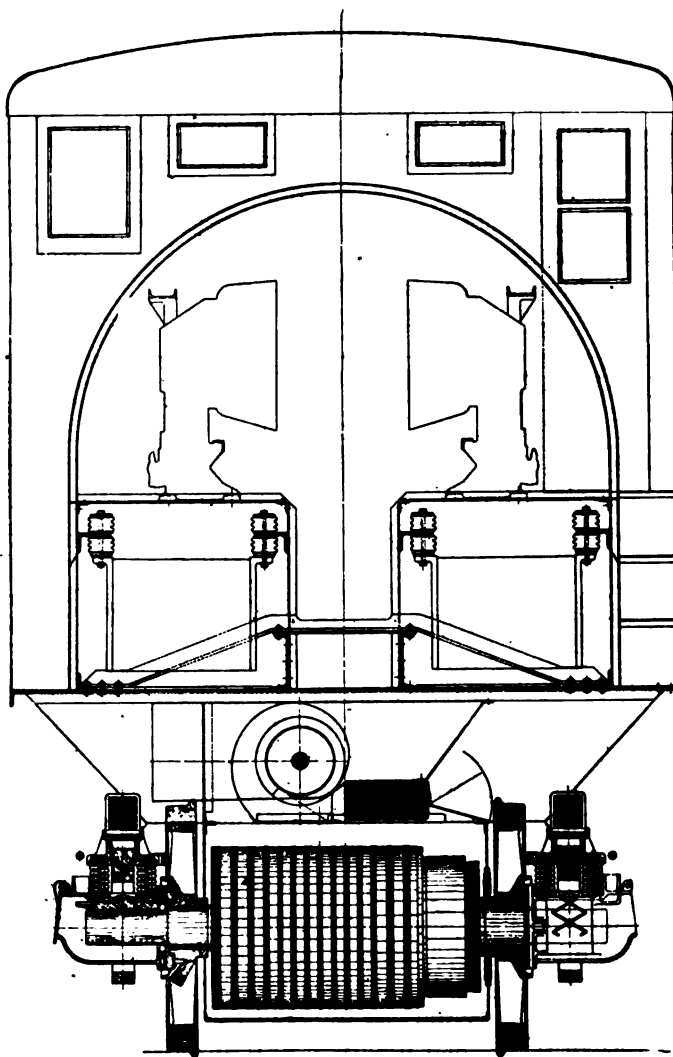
CROSS-SECTION OF APPARATUS CAB
